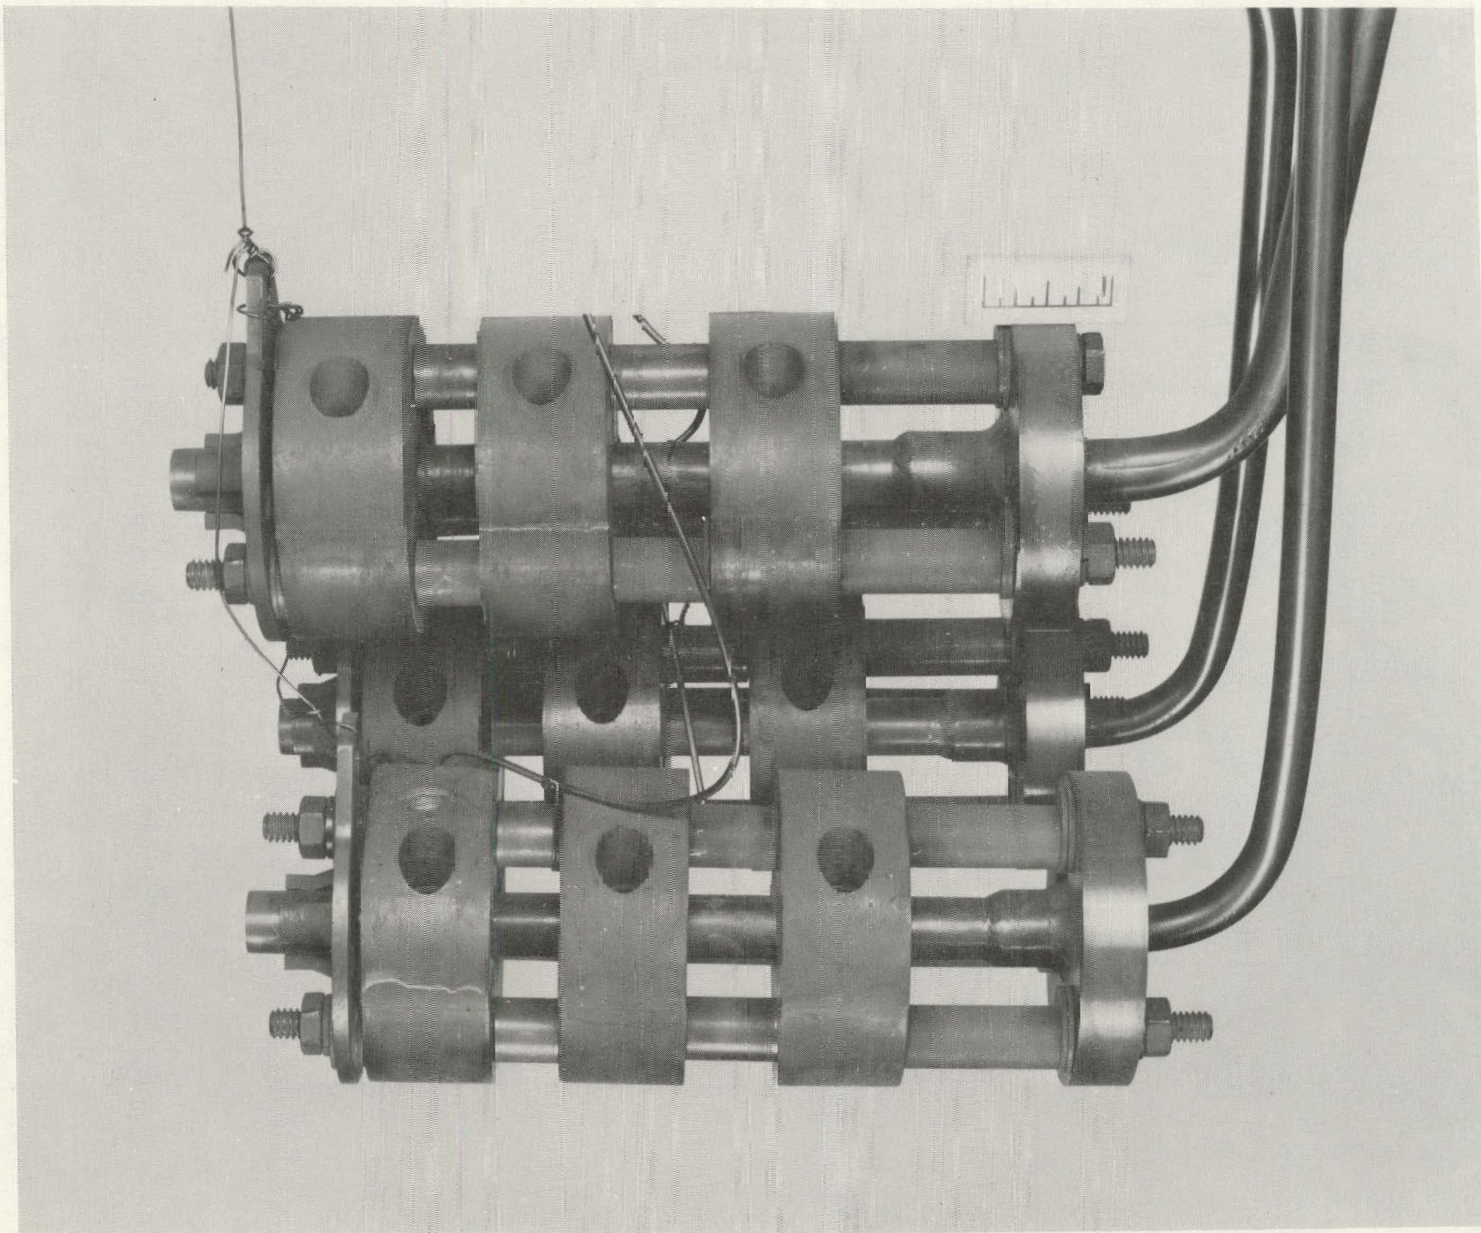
Heated Tube Assembly as removed from test after 4000 hours
